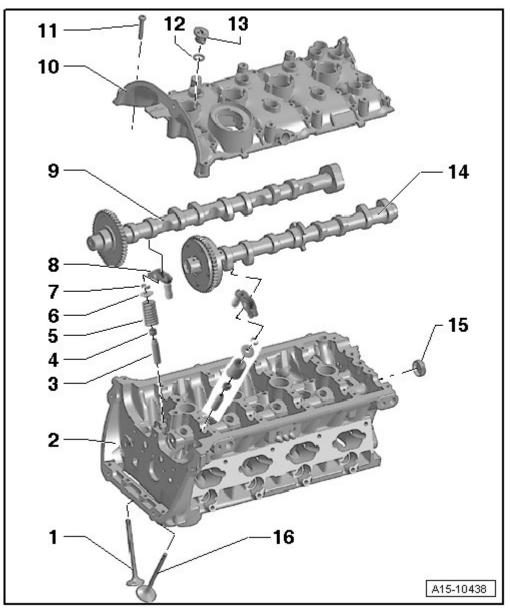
Identifying Assembly Overview: Valvetrain Courtesy of VOLKSWAGEN UNITED STATES, INC.
